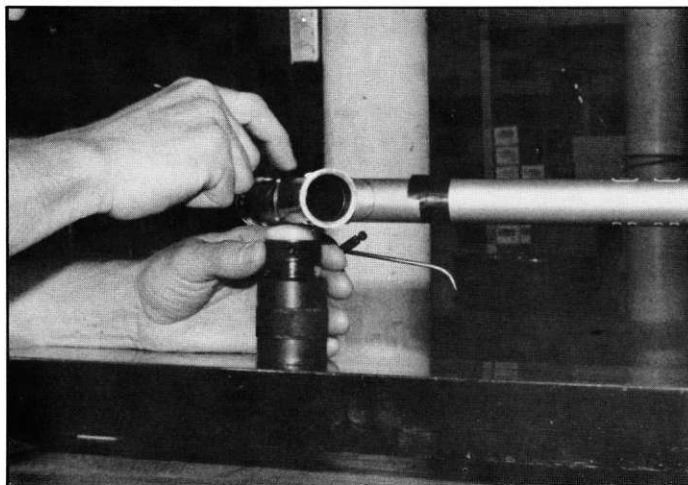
Screw jack is now installed under the head tube. Light "tapping" on the head tube indicates, by sound, when the nylon pillow is snug against the tube.
